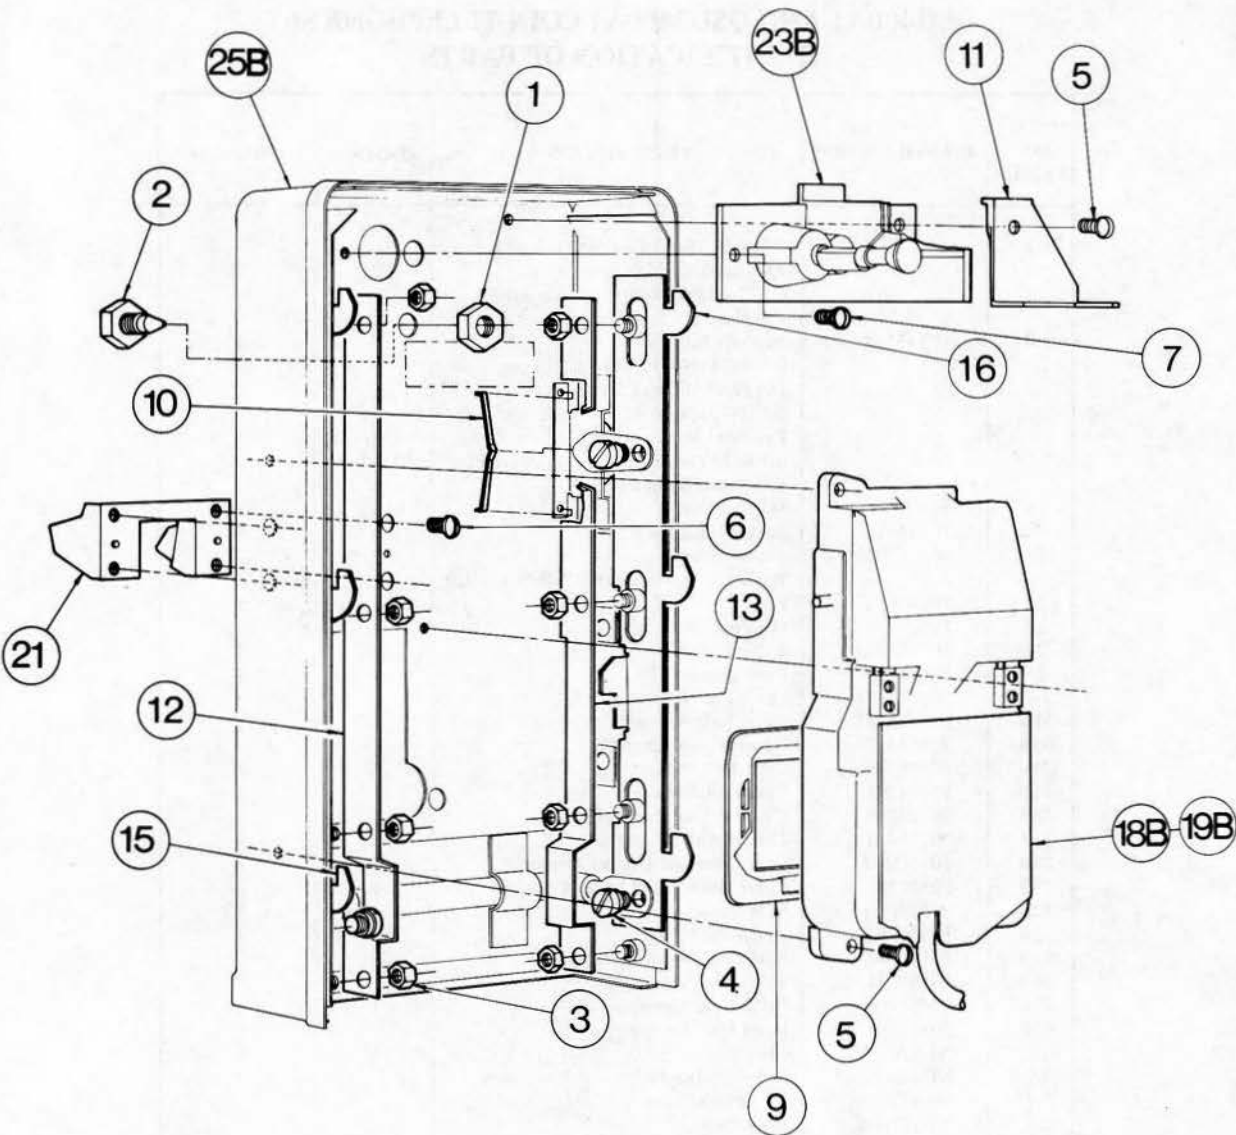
Exploded View of Cover Unit Assembly (P0521273 or P0521274)
